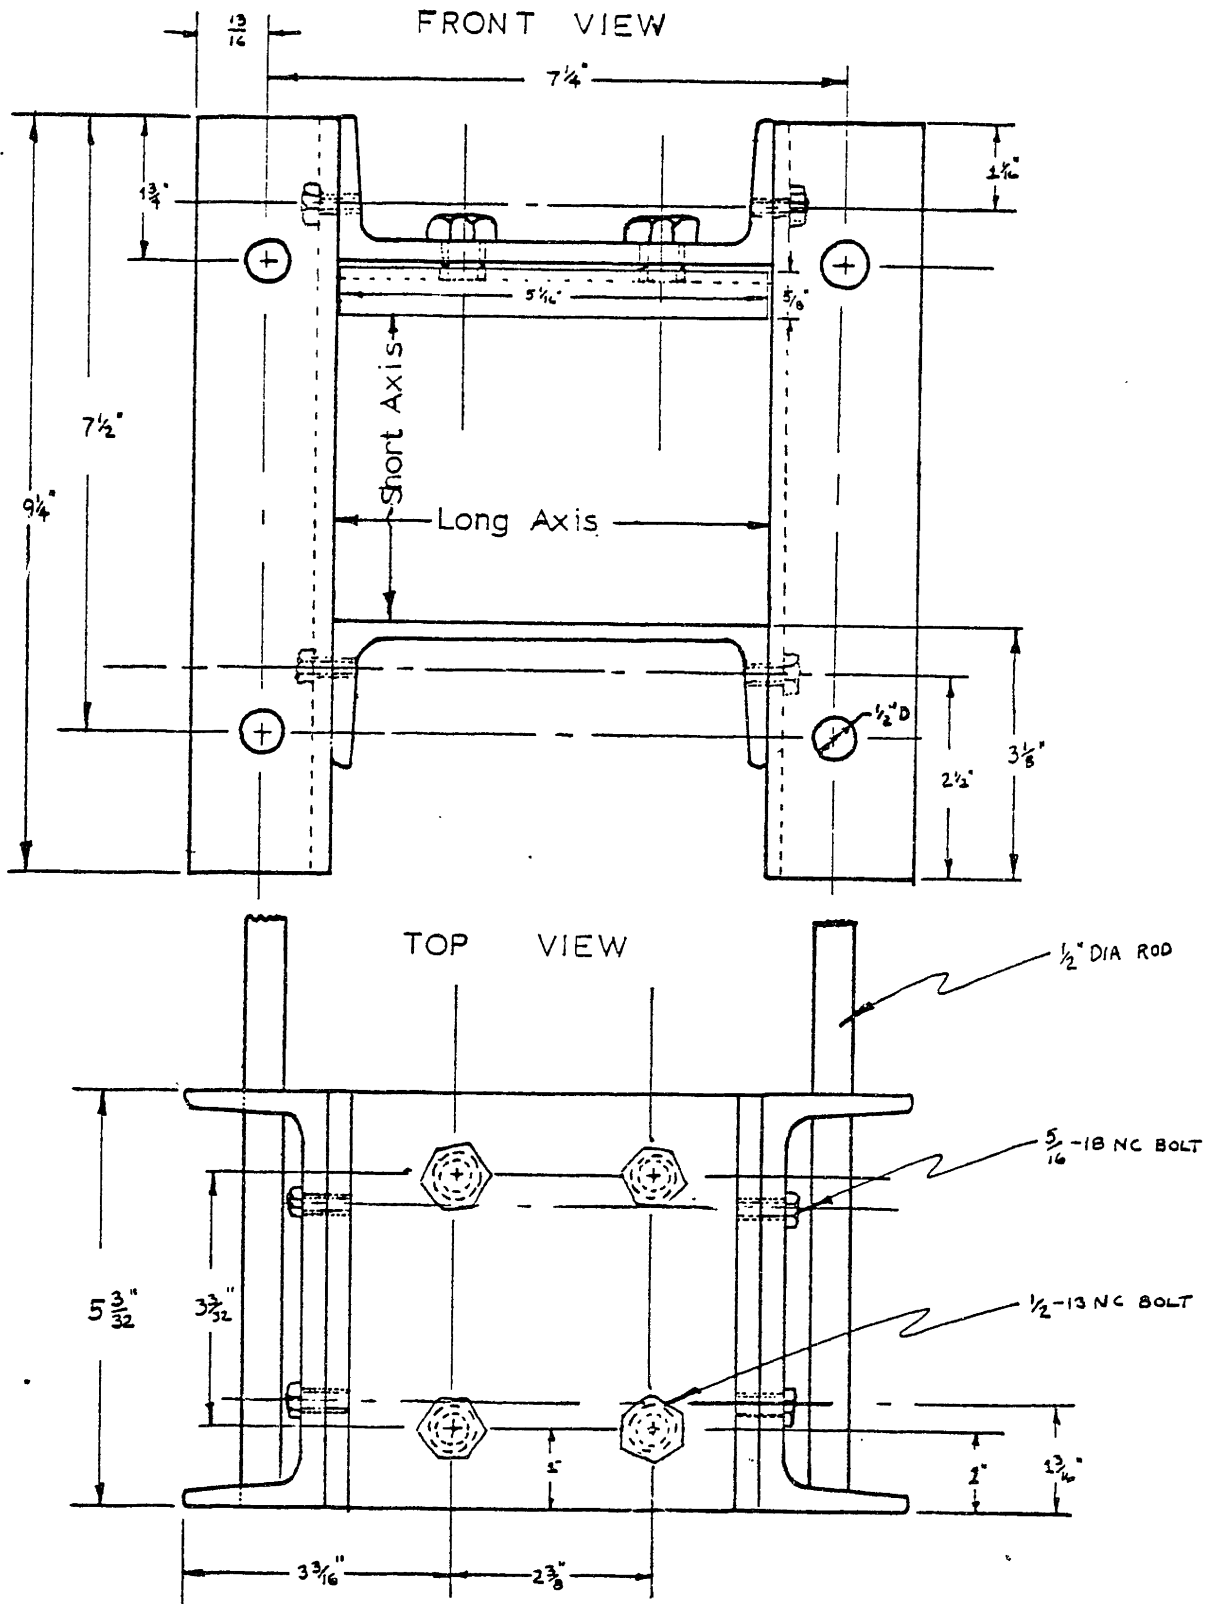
DIMENSIONED DRAWING OF PIN HOUSING
